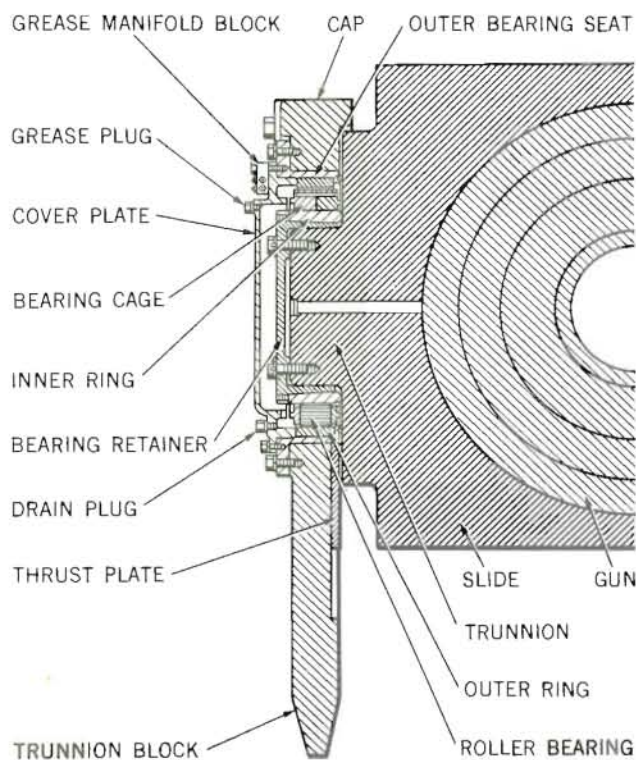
Deck Lug Mk 7 Mod 0, Gun Mk 7 Mod 0, and Slide Mk 6 Mod 0, Sectional View
